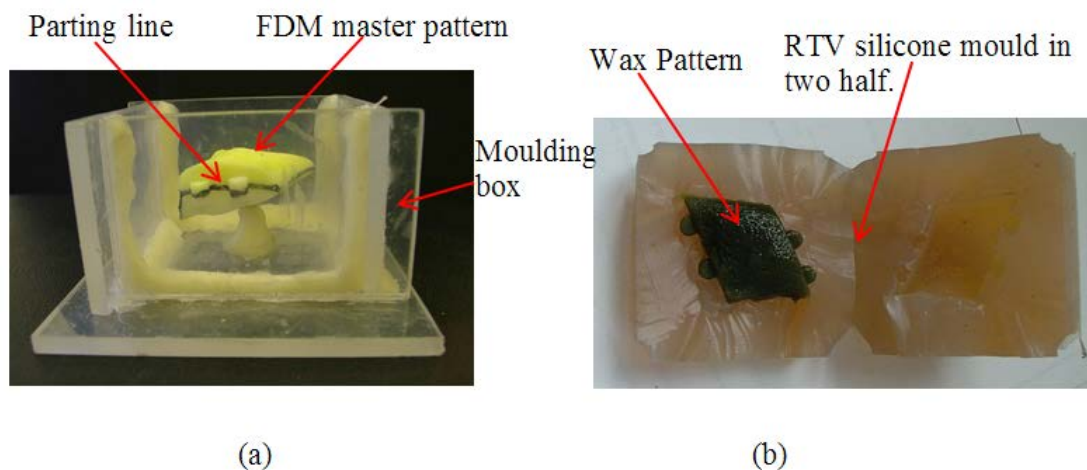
(a) Preparation for soft tooling moulding with FDM master pattern and (b) wax pattern as duplicated from RTV silicone mould of the FDM master pattern.
